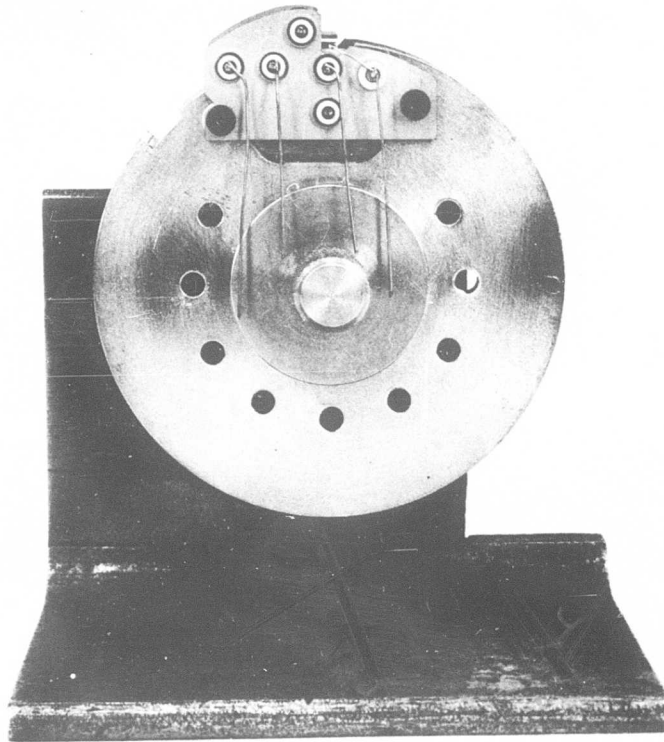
GUN SOLE ASSEMBLY - QKA852
